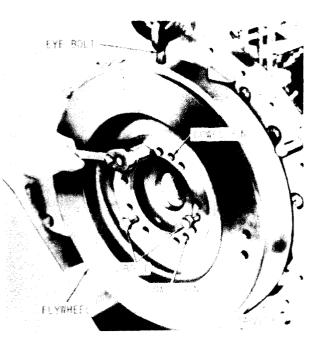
Removing flywheel, model AVDS-1790-2C andI AVDS-1790-2D engines.
